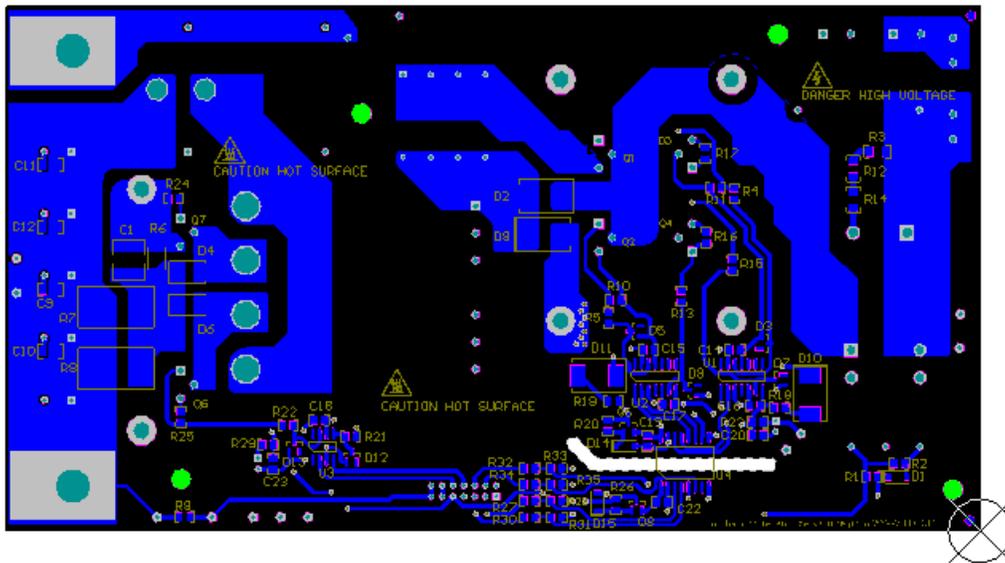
UCC27714EVM-551 Power Stage Bottom Layer Assembly Drawing (bottom view)
